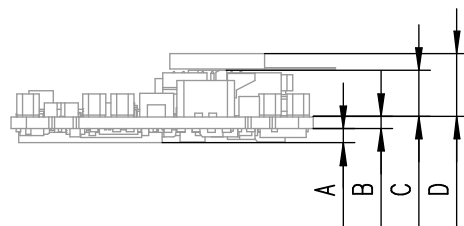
Mechanical Dimensions ETK-S21.1: Microcontroller with Socket Adapter mounted
